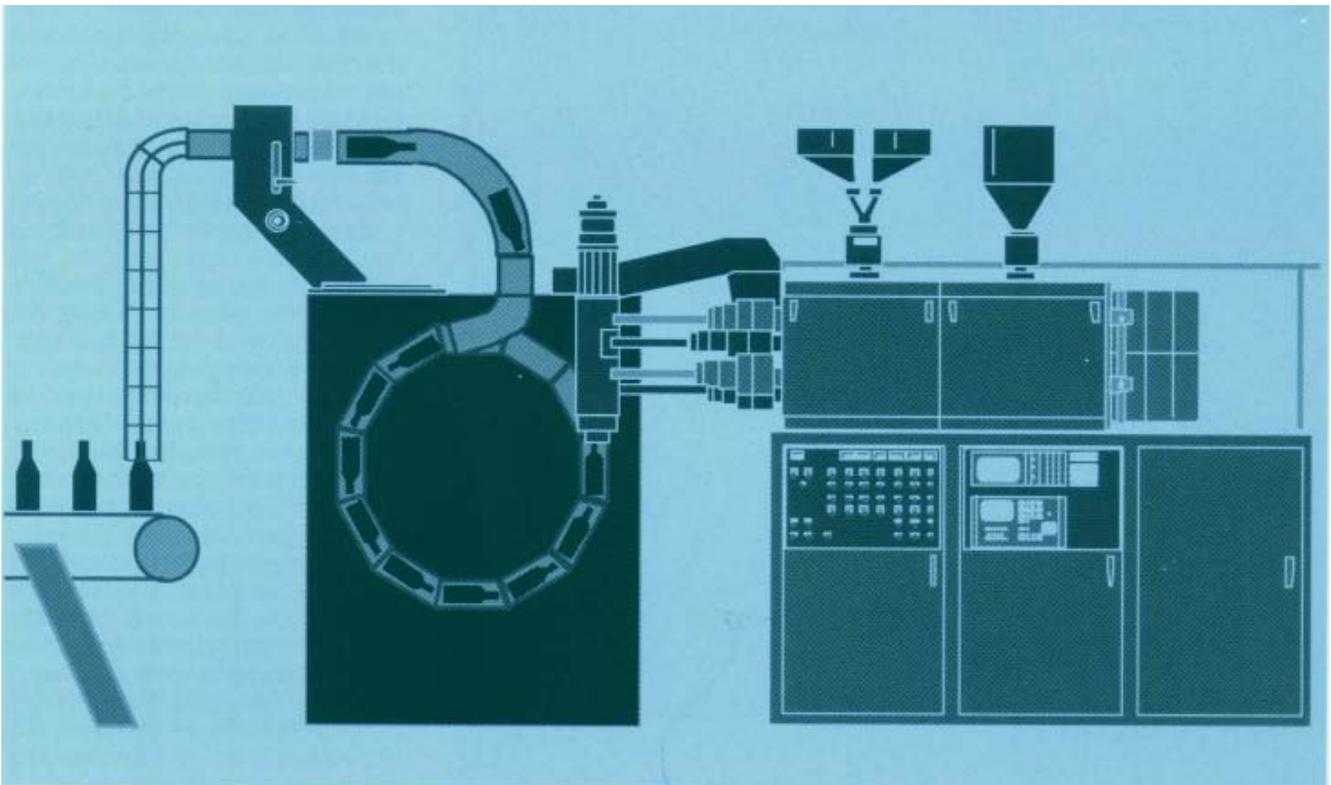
Continuous extrusion blow molding machine with a vertical wheel.
